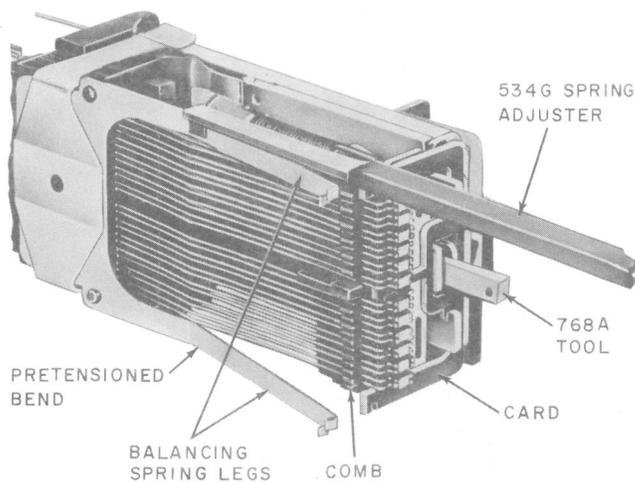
Method of Adjusting Balancing Spring Tension—AL-Type Relay
